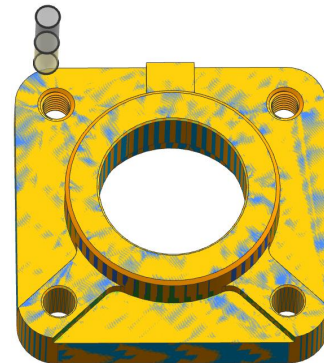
3D dynamic simulation results of machining the front features of the bearing pedestal
